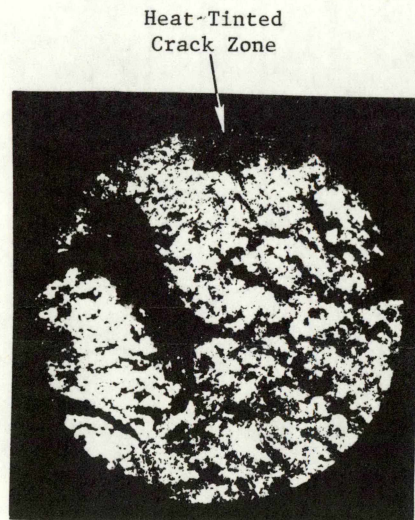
HEAT TINTED CRACK INITIATION ZONE ON SPECIMEN 2-11-E
